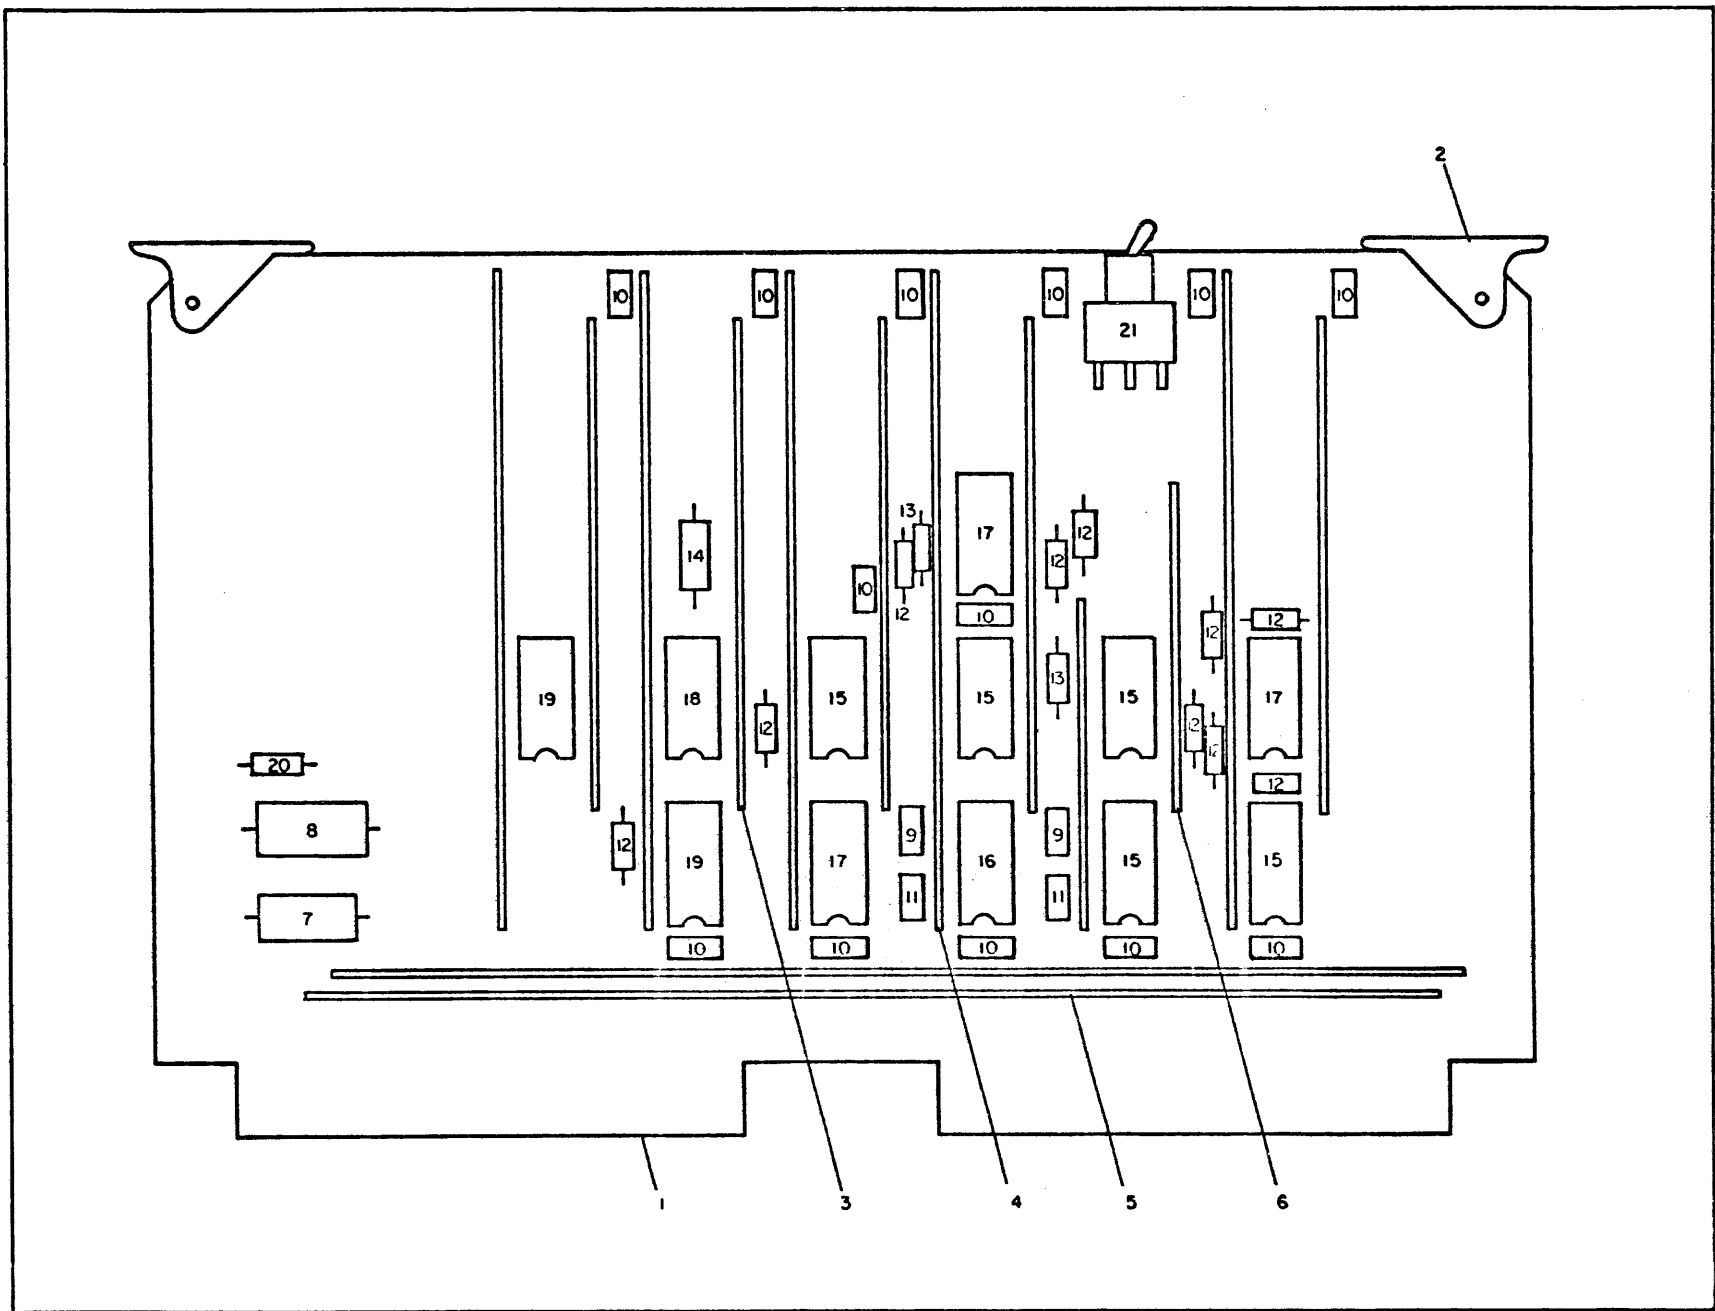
P. C. ASSEMBLY, RECEIVER CARD (Model 2893A)
